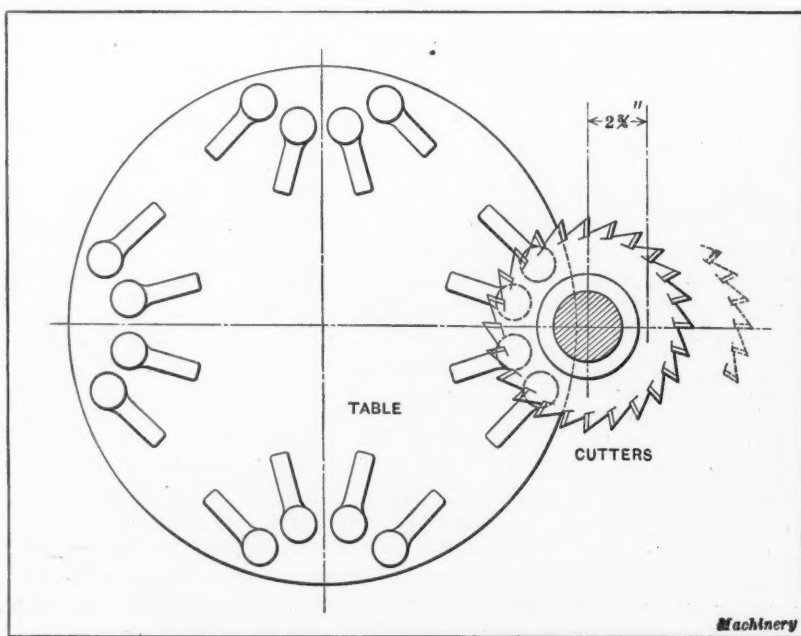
Set-up of Work on Table, and Feeding Movement of Cutters in Station Milling on an Ohio Tilted Rotary Milling Machine
